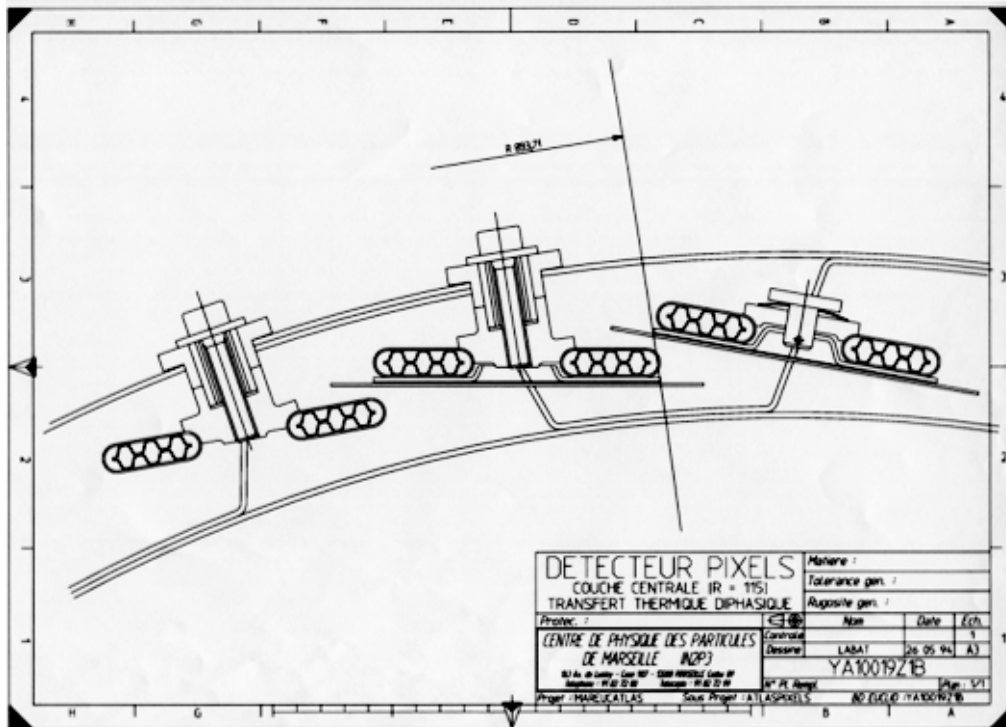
Cross sectional view of the detector support cylinder, showing the mounting of detector ladders
